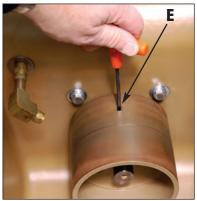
Loosen two set screws on the Lower Pulley with a 5/32" Hex/Allen wrench. Holes in the Pulley "E" line up with the two set screws.
